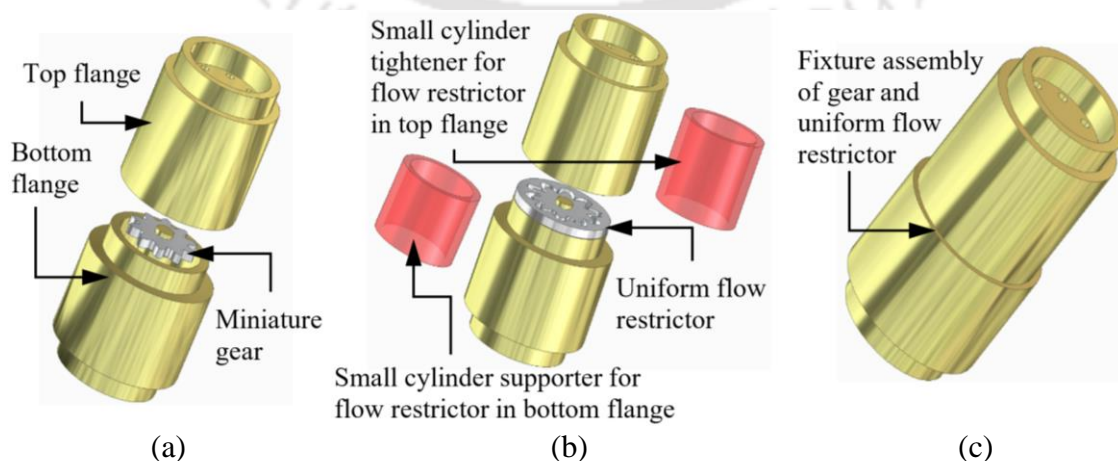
Detailed view of (a) gear fixture, (b) gear with uniform flow restrictor, and (c) complete workpiece fixture assembly
